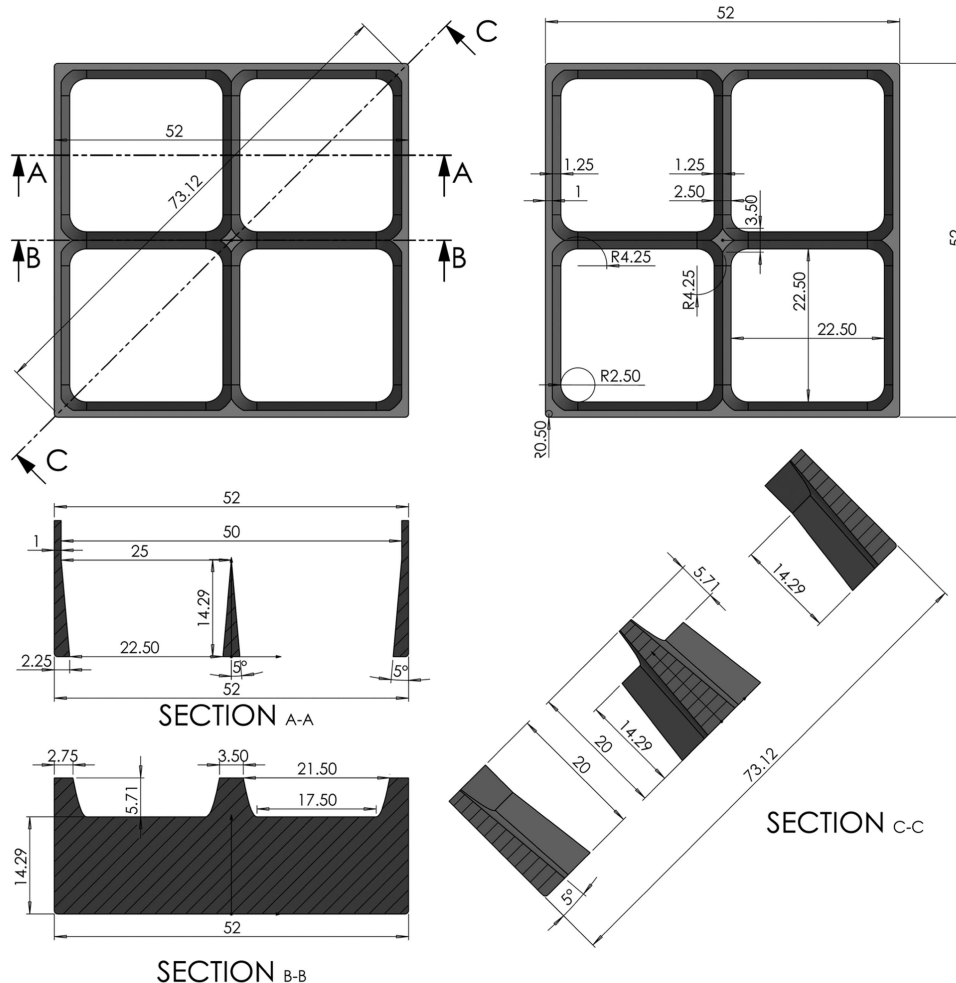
Schematic diagrams of 3D printed molding containers with horizontal and diagonal cross-sections.
